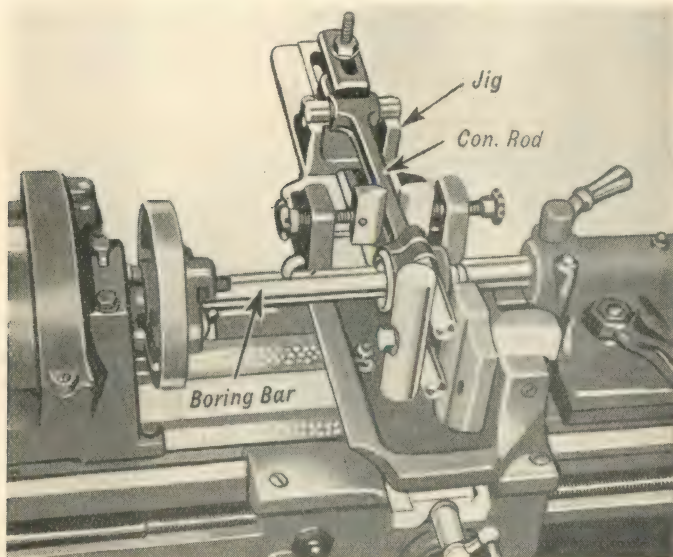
METHOD OF BORING BIG-END BEARINGS
